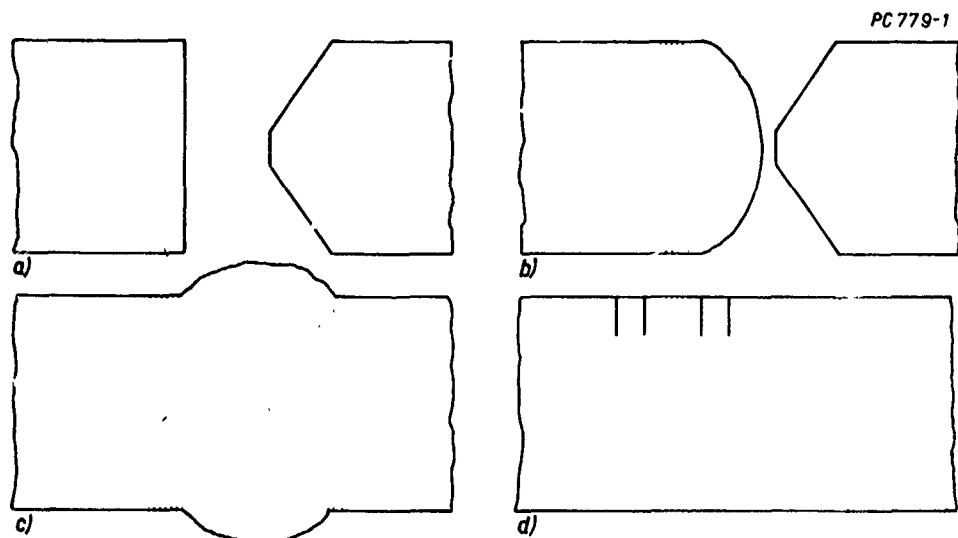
K-preparation welding procedure (a) joint preparation, (b) one side buttered with weld metal, (c) joint completed, and, (d) joint machined and notched as required.
